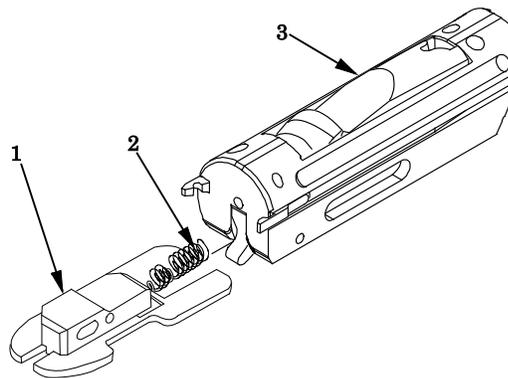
Assembly of Bolt Assembly and Bolt Carrier Assembly.
